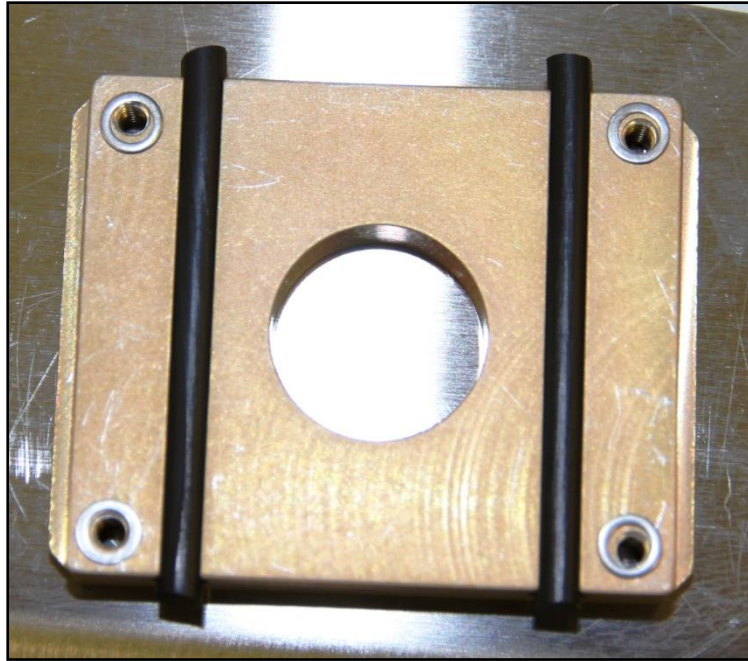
O-Ring Bottom Plate with O-Rings and Washers
